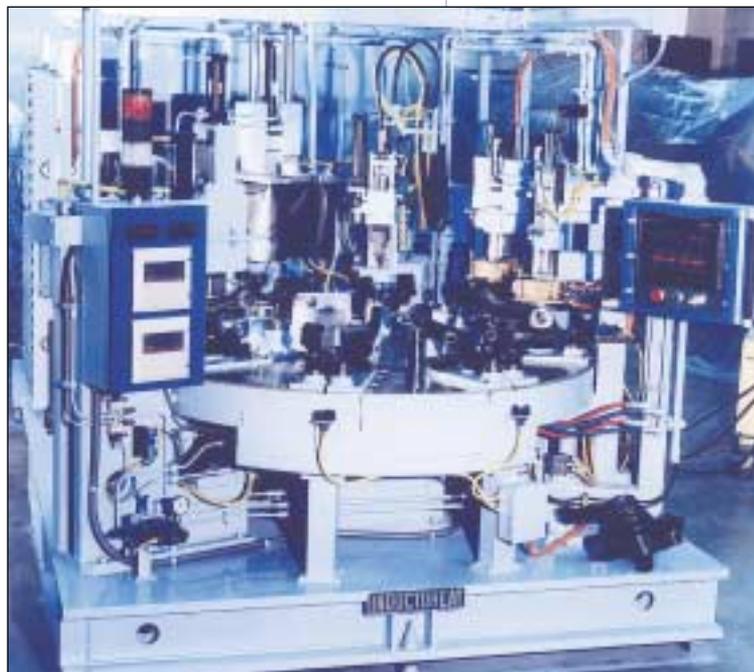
Eight-station shrink fitting machine is used to assemble truck steering knuckles. The Inductoheat system produces 30 knuckles per hour.
